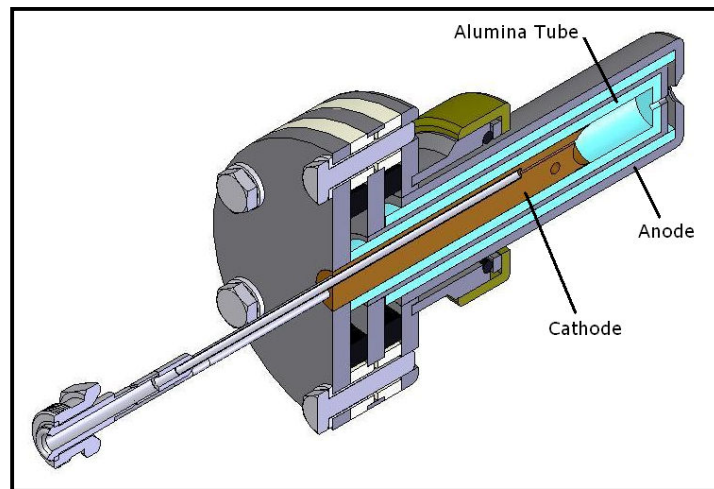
A cross-sectional view of the plasma gun, showing the cathode, anode, and alumina tube.
